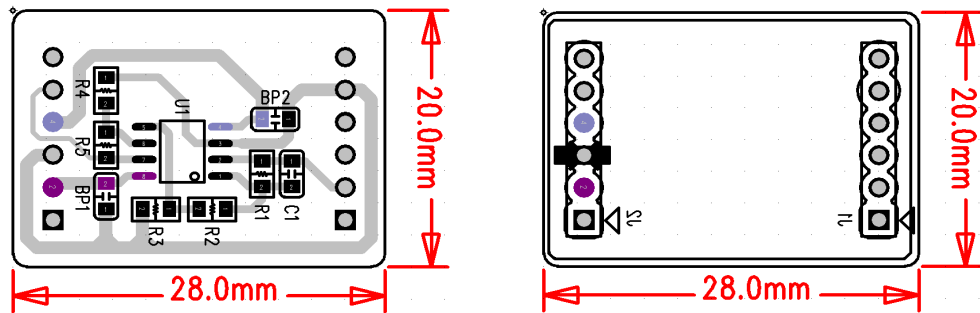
PCB layout (Ver. 3) of top (left) and bottom (right)
